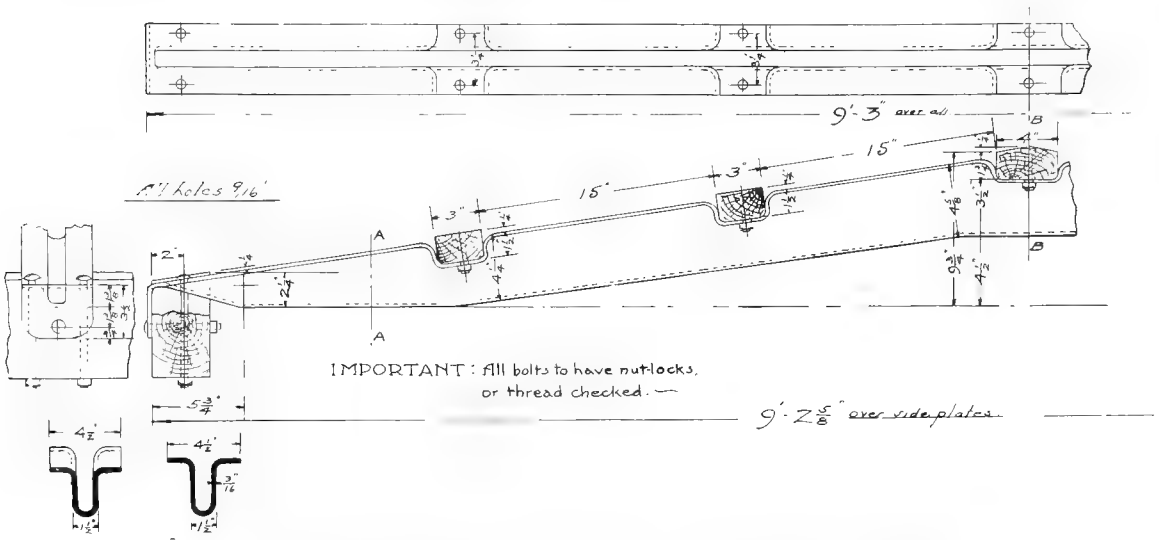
Cleveland Type B Pressed Steel Carline, Heavy Pattern with Diminishing Ends. Cleveland Car Specialty Company.
